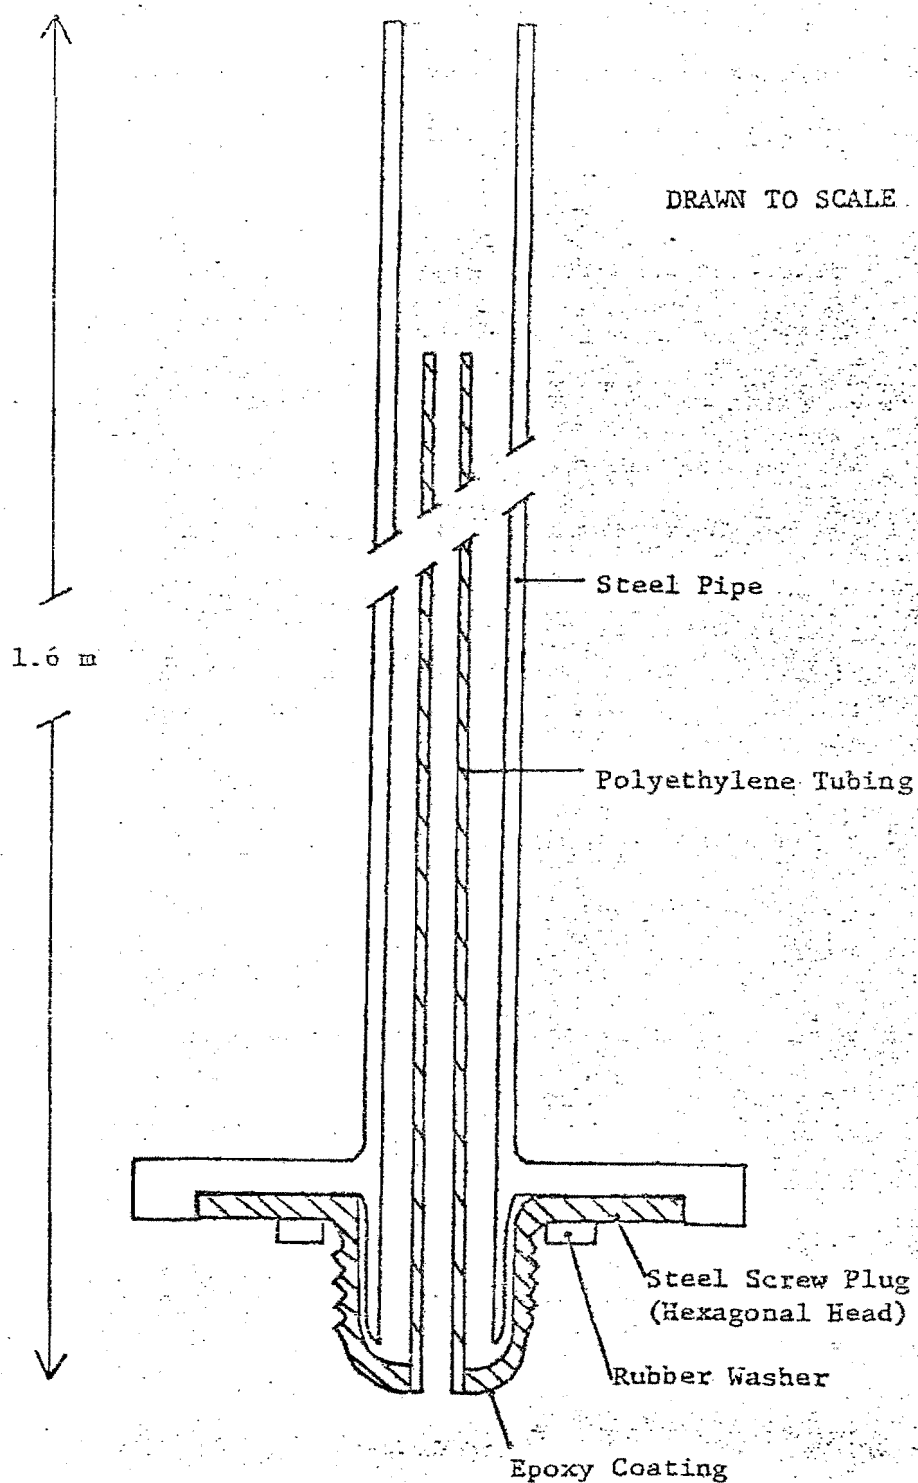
Full-section view of underwater wrench and one-hole screw plug with tube. Full-section view. When bent slightly and inserted into the wrench handle, the tube holds the plug in place until attached and also guides the wrench to the plug for removal.
